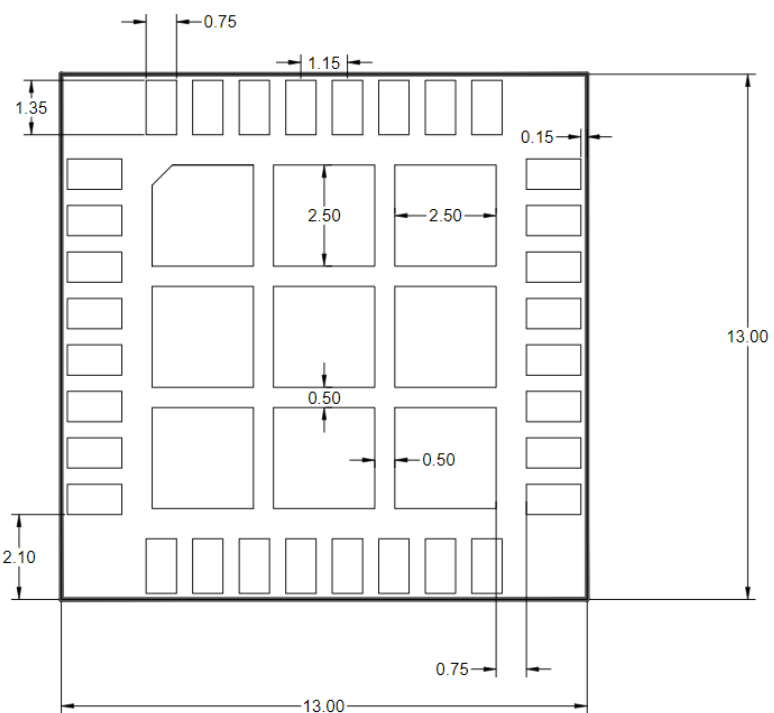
RECOMMENDED PCB FOOTPRINT FOR SHIELDED HTNB32L-XXX.
